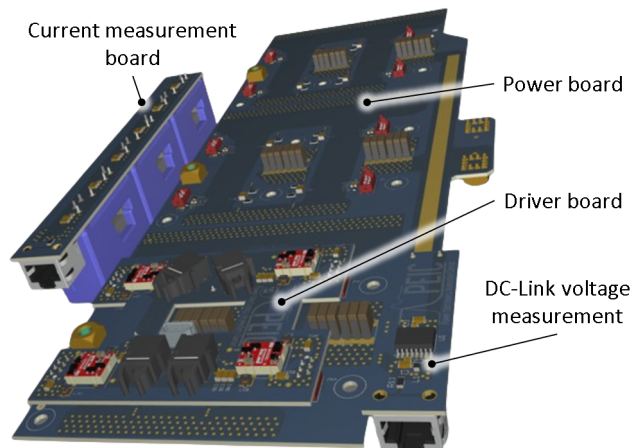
3D rendering of the complete converter multi-board assembly. The power, driver and measurement board are outlined.
